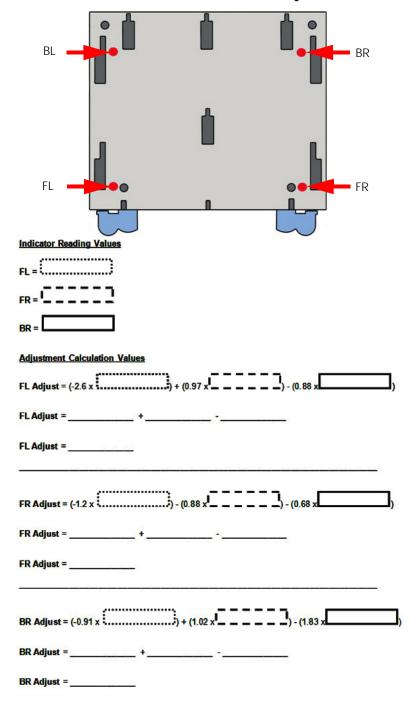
uPrint and uPrint SE measurement points and worksheet
